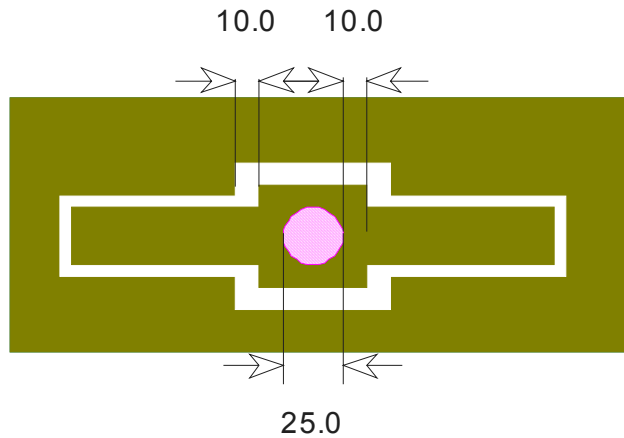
Initial Layout for the Lines and a Via Showing Dimensions
